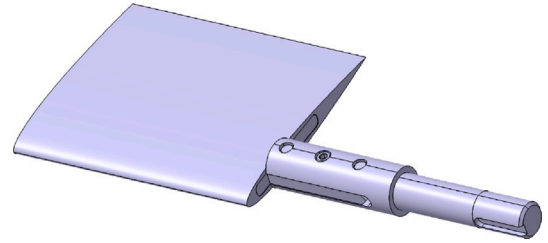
CAD of NACA 0012 profile with traditional mounting system. Chord is 0.15 m.
